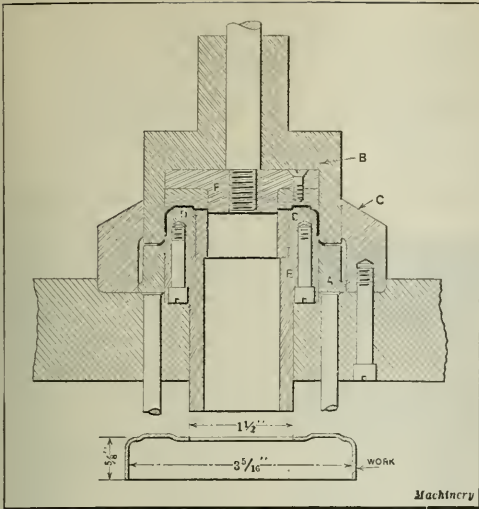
Performing Blanking, Drawing, Trimming and Punching Operations in a Single Stroke of the Press
